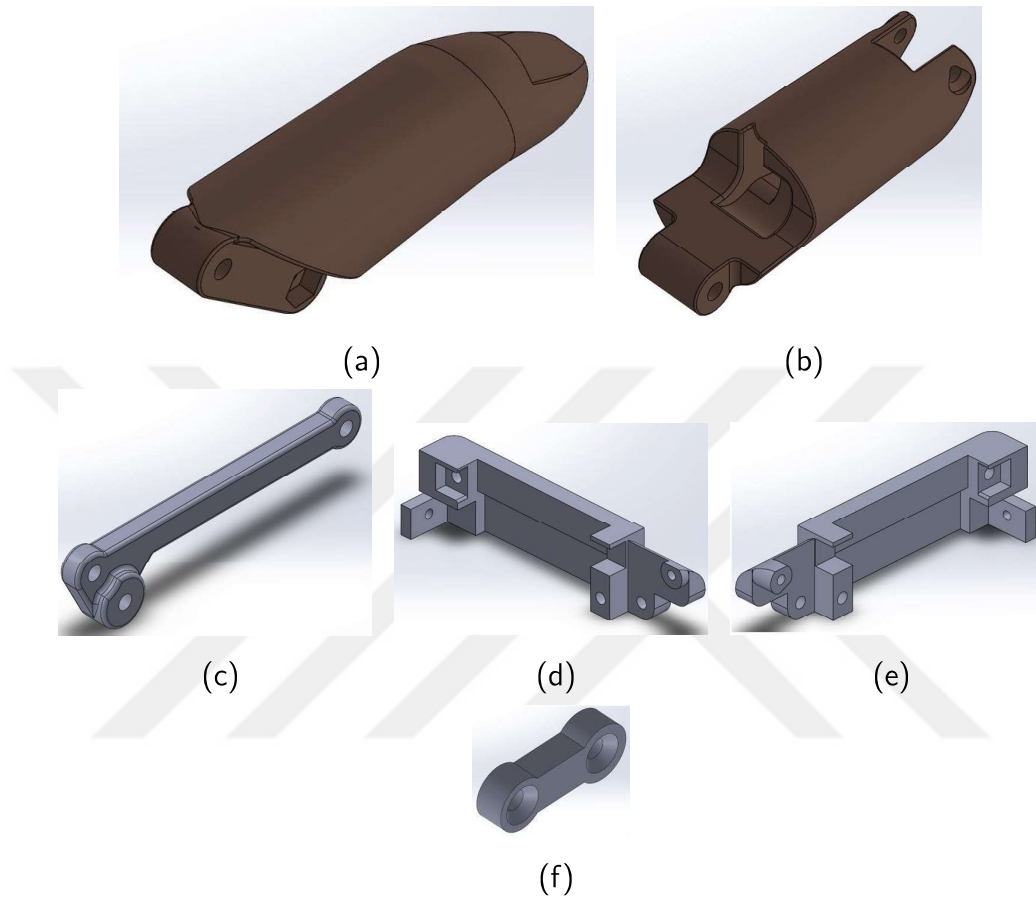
The parts of the final designed finger (a) Finger PIP and DIP (b) Finger MCP (c) Finger Link 2 for four bar mechanism (d) The auxiliary link to connect the four bar mechanism to linear actuator and form slider crank mechanism (e) The housing for actuator left side (f) The housing of actuator right side
